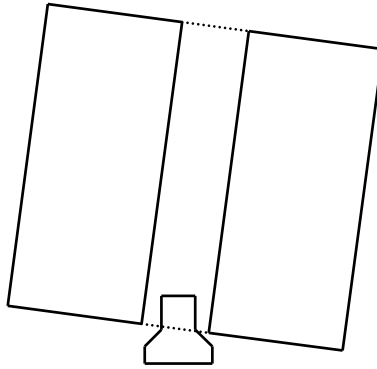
Example schematic of how a short punch with tolerance can angularly move in a die.
